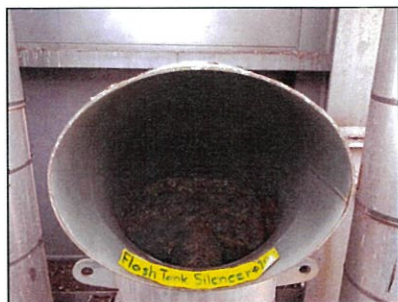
Visual inspection and remove scale on deaerator silencer
